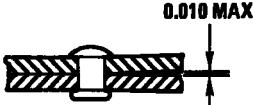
Solid Fastener Inspection (Sheet 1 of 4)
